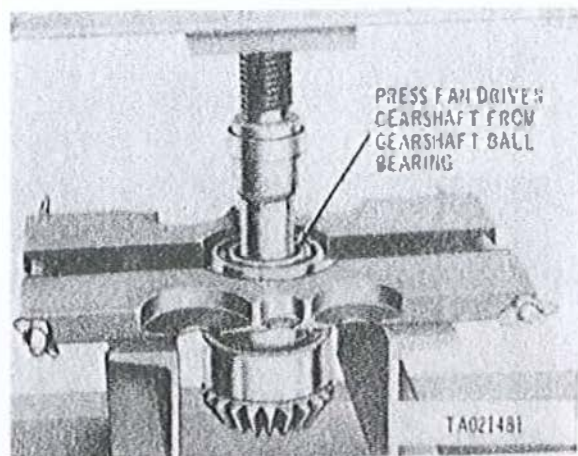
Pressing fan driven gearshaft from upper gearshaft ball bearing.
